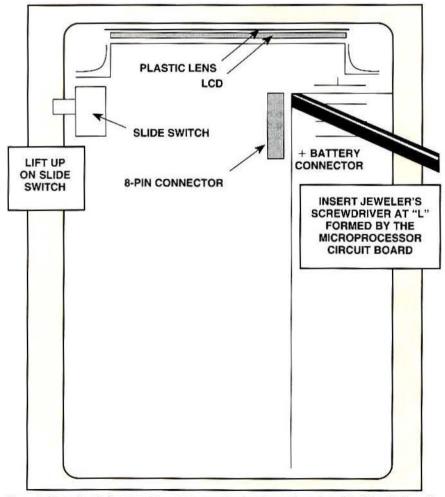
Use a jeweler's screwdriver to remove the decoder and receiver circuit boards from the Bravo pager housing.
